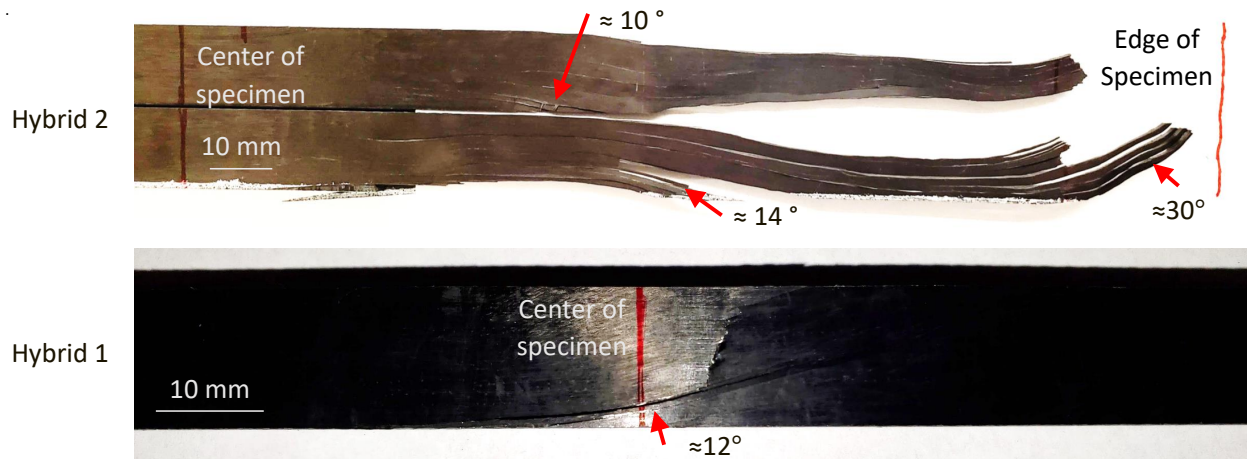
Fracture surfaces of hybrid 1 and 2 specimen exhibiting fiber waviness.
